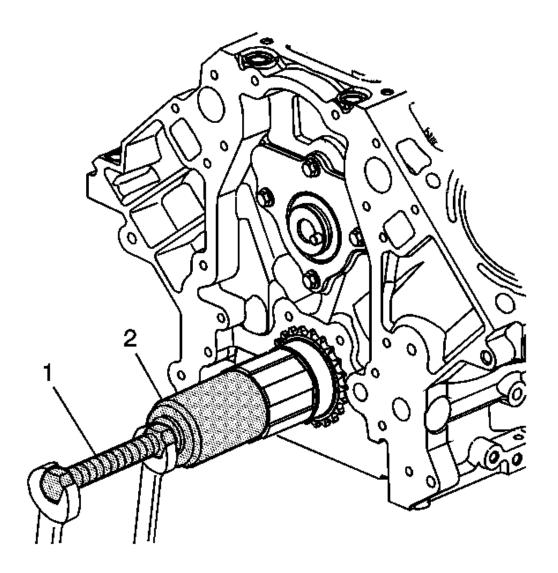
View Of Crankshaft Sprocket & Installer Courtesy of GENERAL MOTORS CORP.
